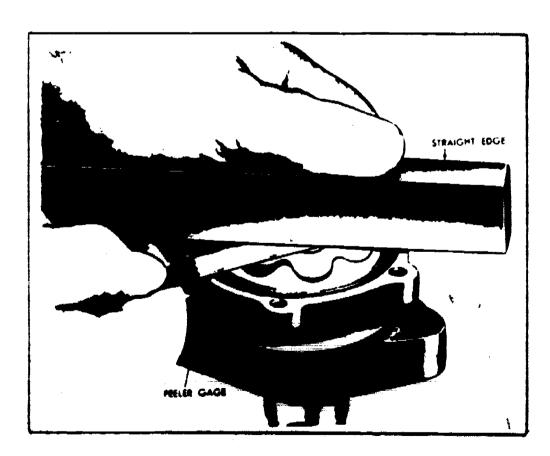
Checking Inner and Outer Rotor Clearance to Cover.
